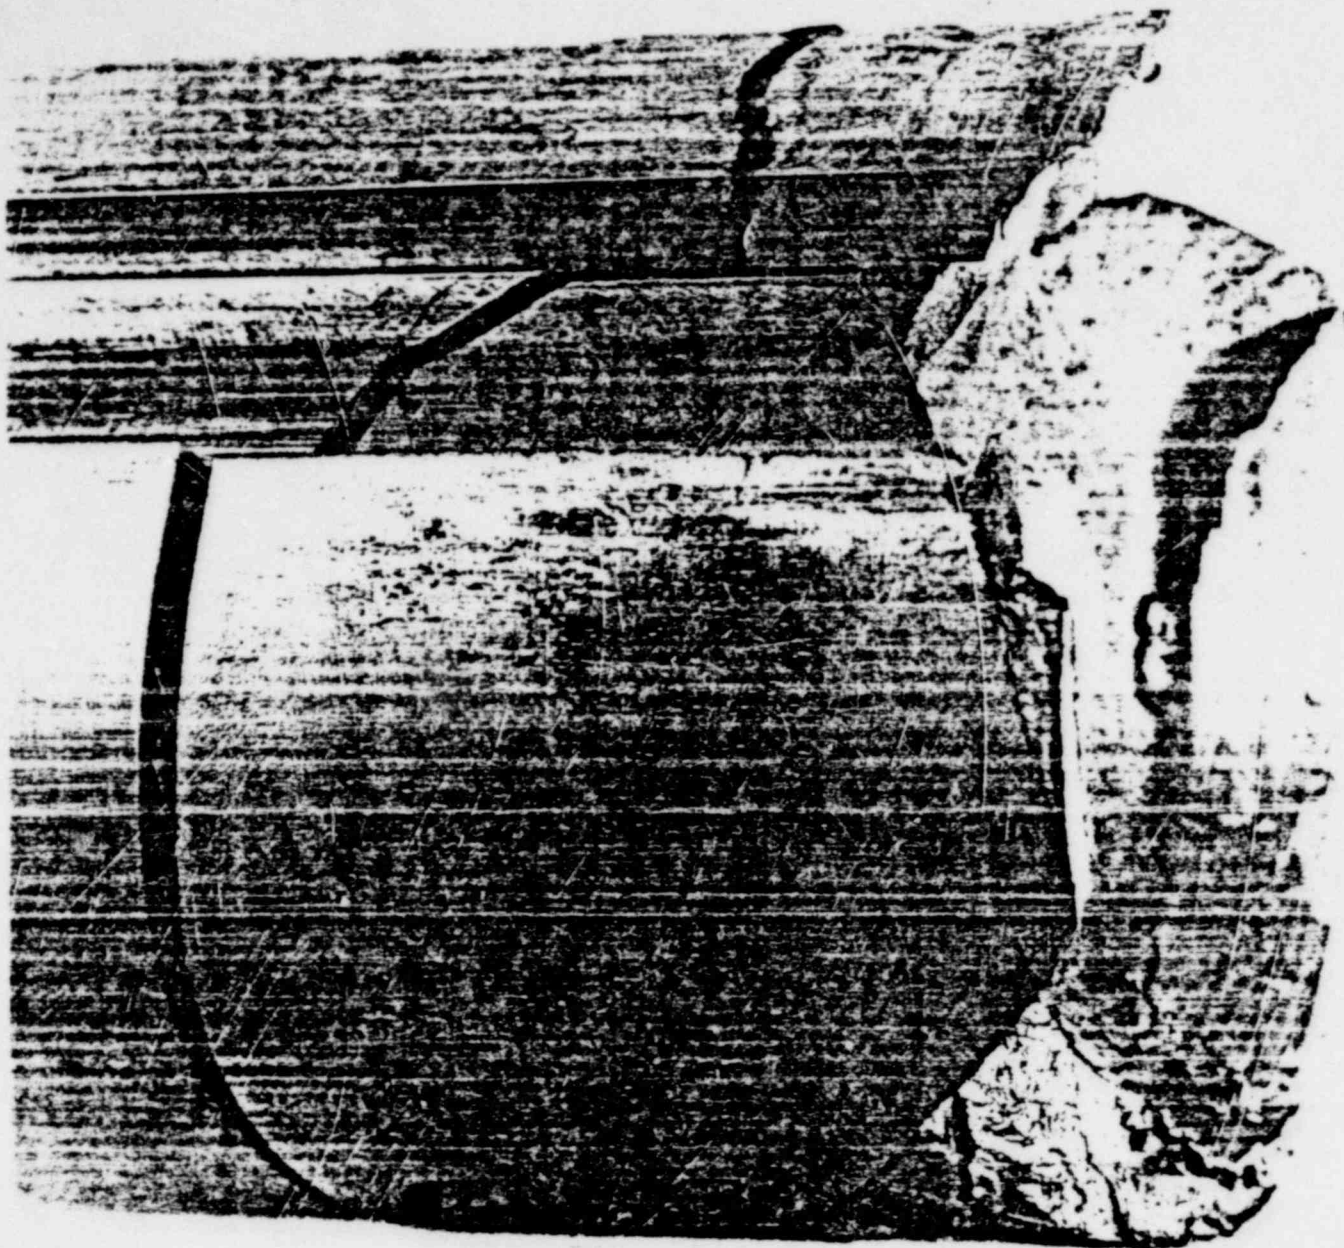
Photomacrograph showing longitudinal crack in keyway corner.
